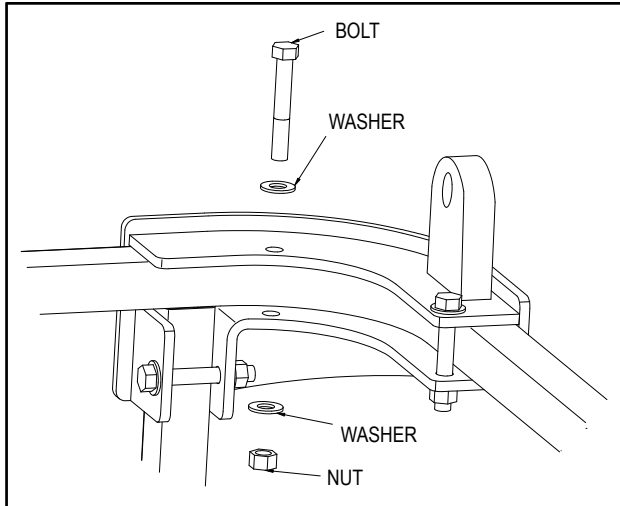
Bolt-On External Fall Arrest Cable Tension
